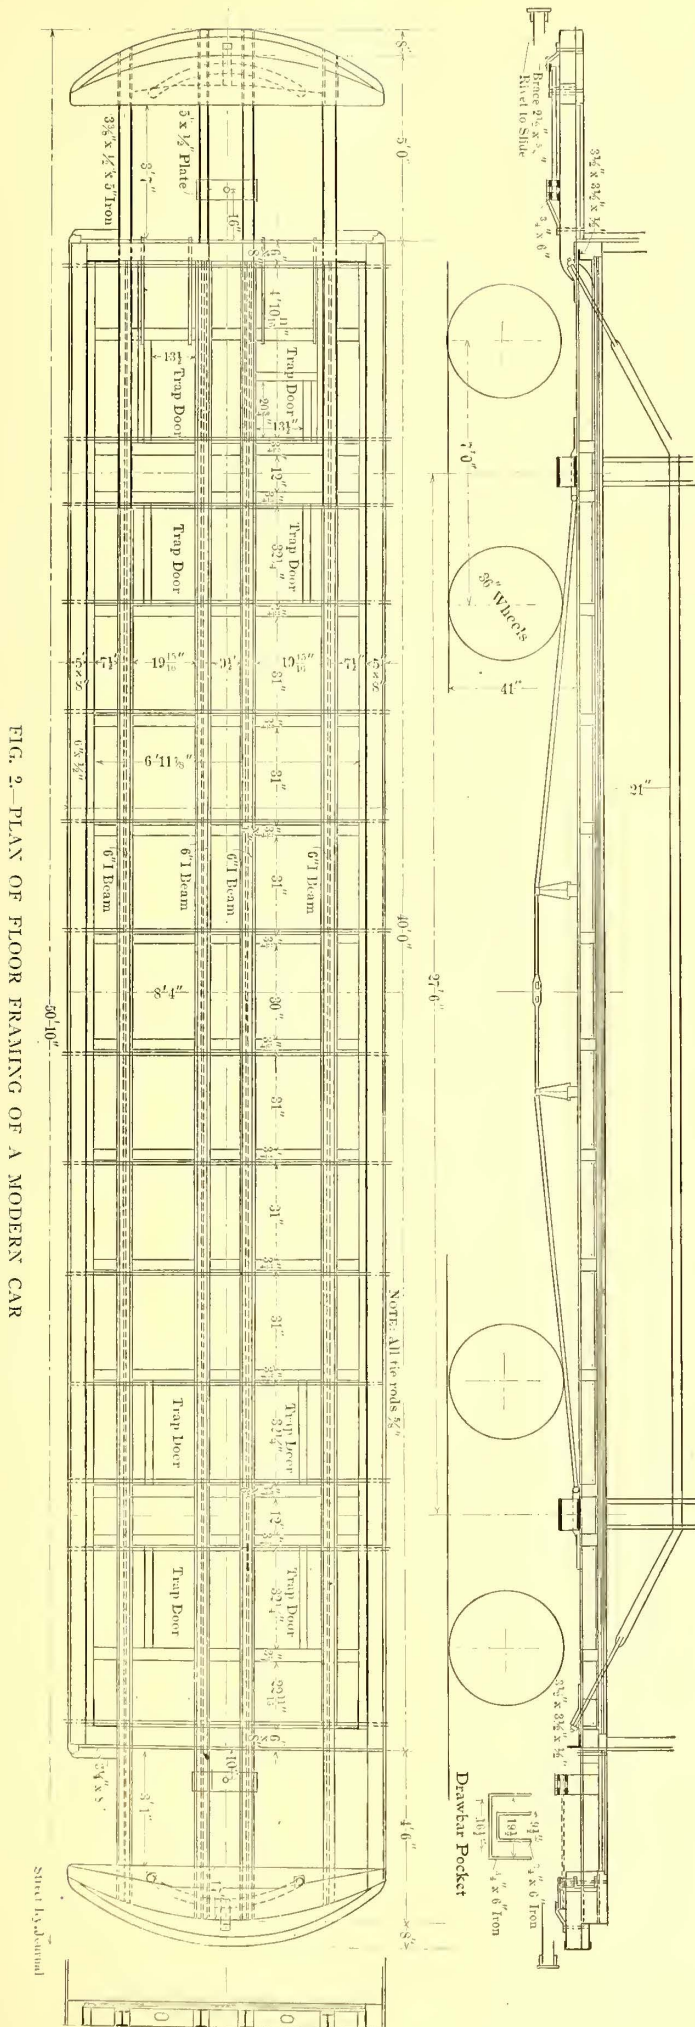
PLAN OF FLOOR FRAMING OF A MODERN CAR
